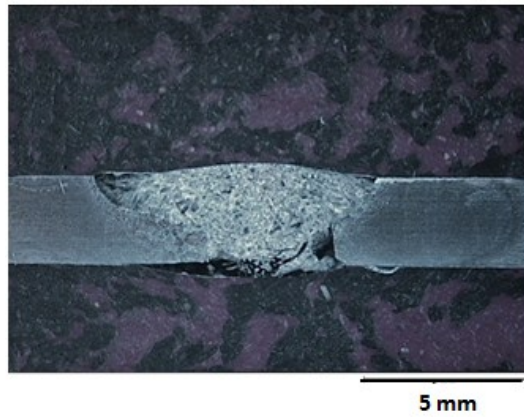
Macrograph cross section of one welded sample
